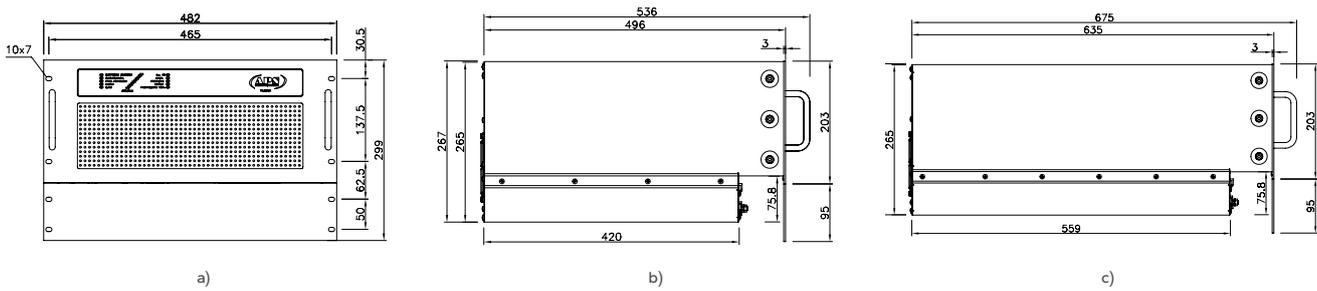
Views with dimensions of the BFlz / BFI M type inverter module:
